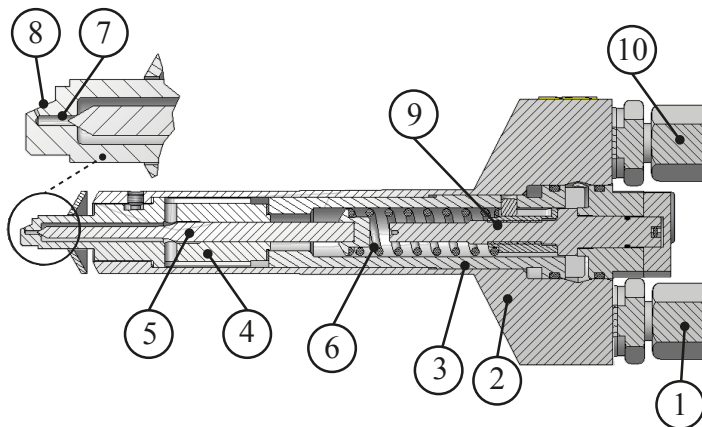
A third generation HJ SIP injection valve from Hans Jensen Lubricators. Consisting of (1) inlet, (2) valve housing, (3) inner part, (4) nozzle, (5) needle, (6) spring, (7) sac hole, (8) spray hole, (9) adjustment screw, and (10) return pipe.
